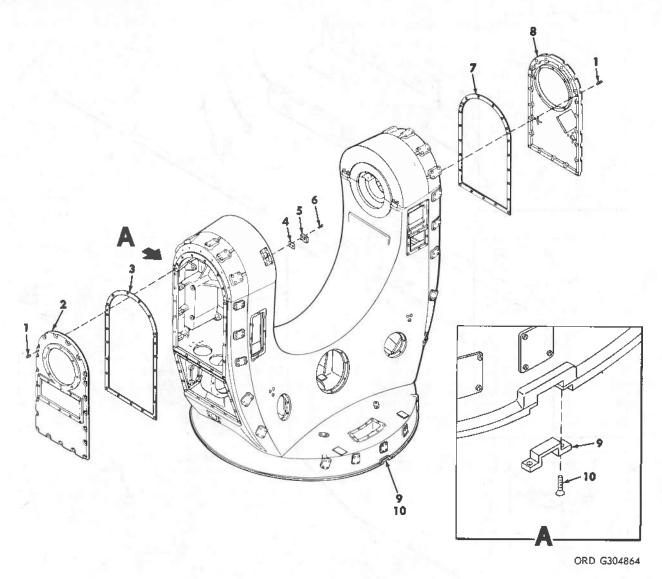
COVER /8172240/-EXPLODED VIEW /SEE FIGURE 175 FOR NEXT HIGHER ASSEMBLY/
